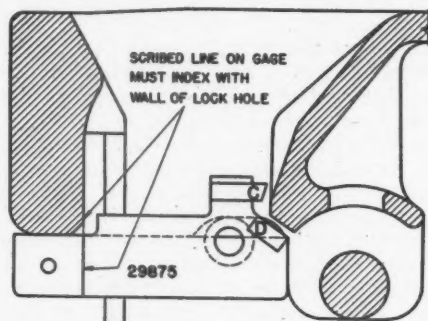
Gage No. 29875 properly applied to incorrectly modified coupler as in Fig. 3—Clearance at *C* and *D* must be built up by welding as in Fig. 5
